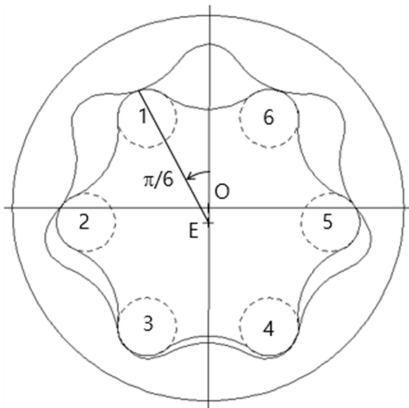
Meshing of a gerotor with a pin-tooth inner rotor.
